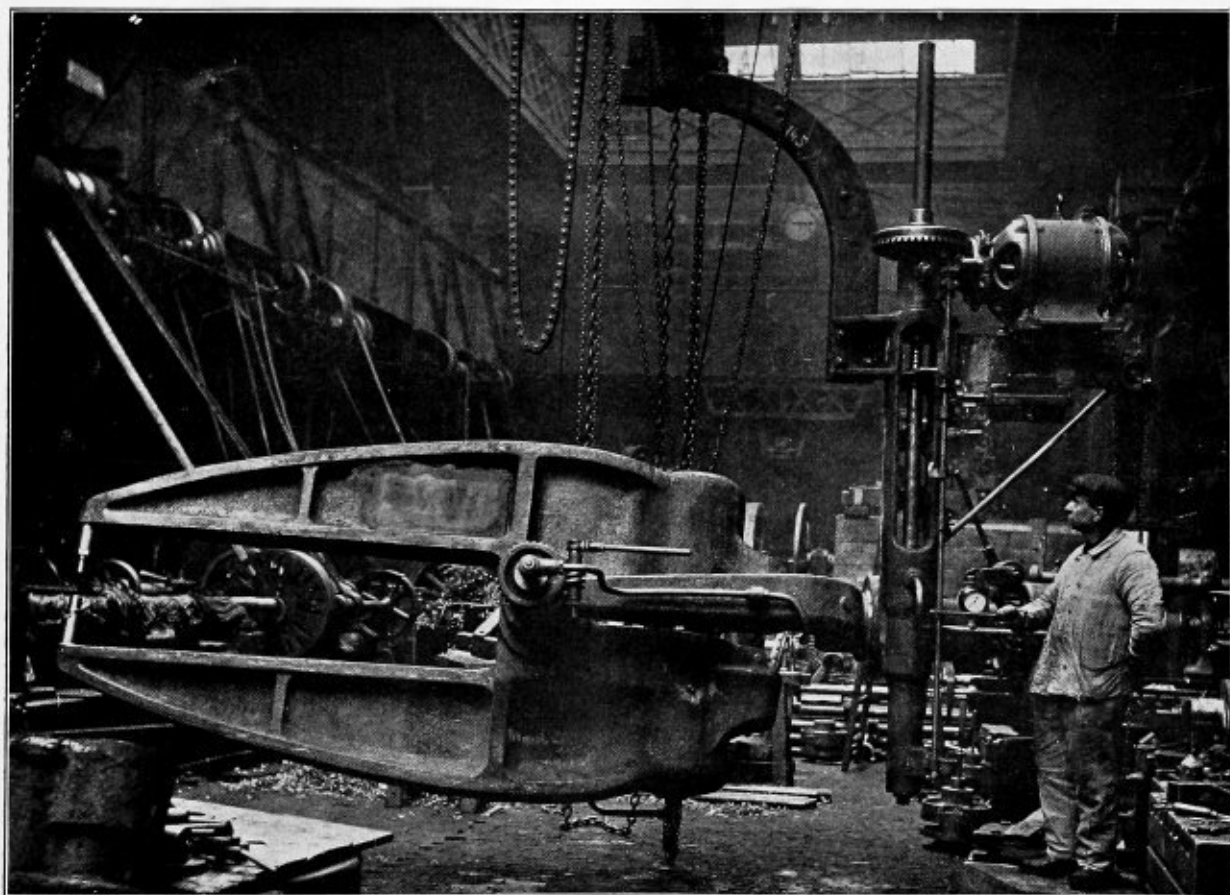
LARGE SIZE ELECTRIC-HYDRAULIC RIVETER USED IN FRENCH BOILER SHOPS.
